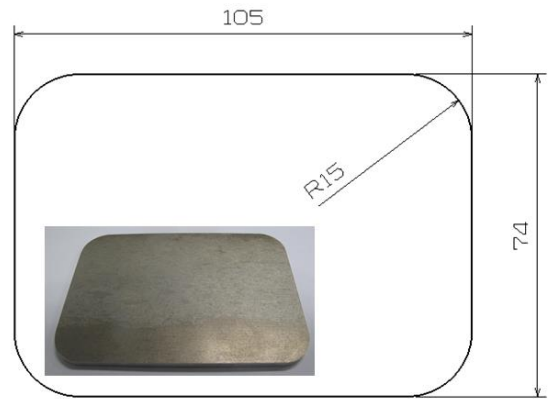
Initial plate obtained through wire machining from 4.5mm AZ31B sheet
